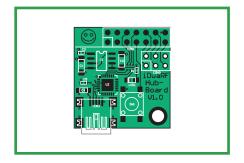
The iDwaRF module is mounted on the hub printed circuit board.
